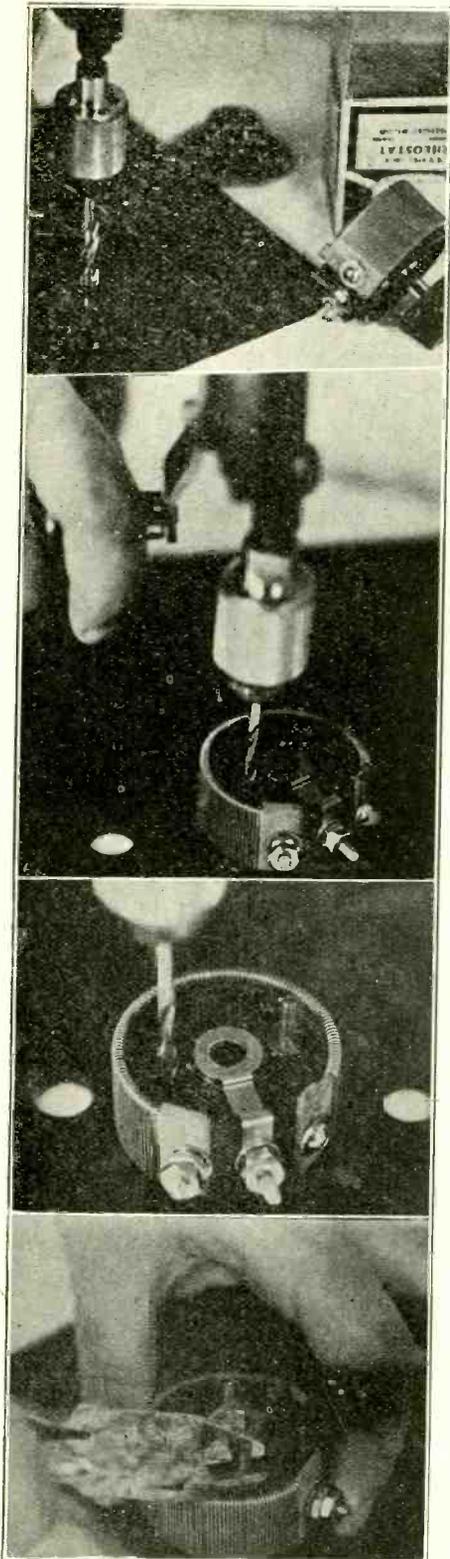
(top), drill panel in usual manner with 1/4" drill. Fig. 2, place shaft through panel and rheostat and drill one hole for mounting screw. Fig. 3, place mounting screw in hole just drilled and after fastening with small nut, drill the other hole in the same manner. Fig. 4, if after fastening things up it is found the screws are a little long and interfere with the passage of the rheostat contact arms, cut the protrusions off with a pair of diagonal cutting pliers.
